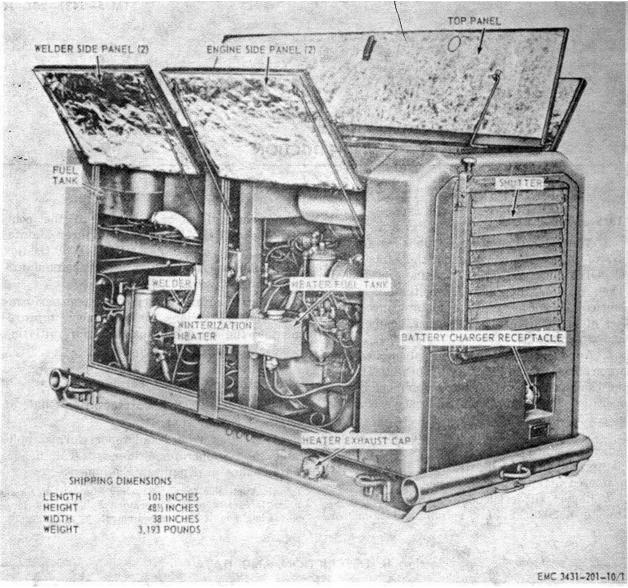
Welding machine, right front, three-quarter view, with shipping dimensions.
